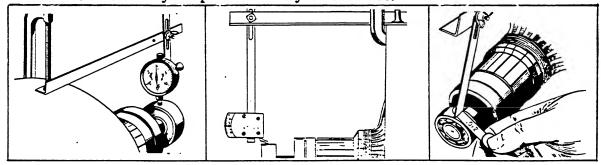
CHECKING GENERATOR BEARING RUNOUT
